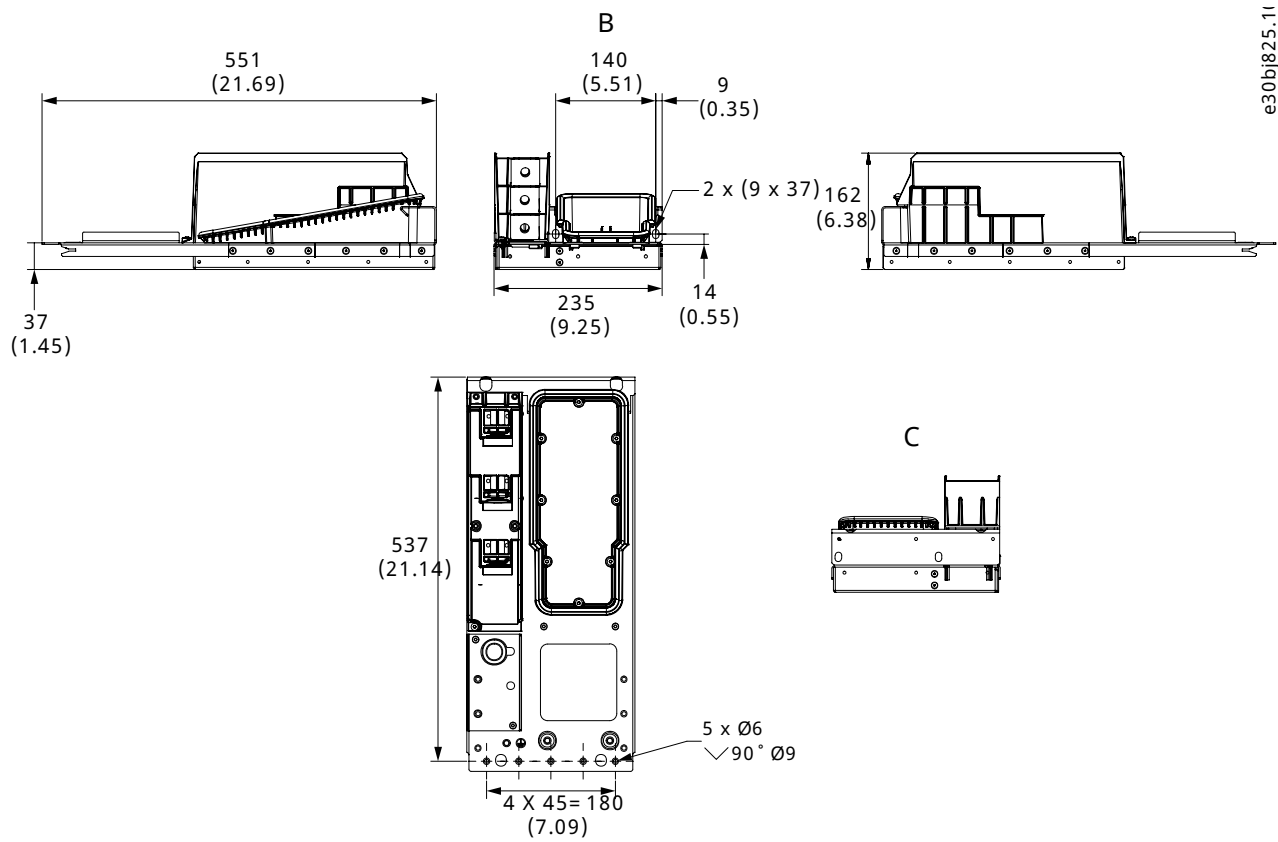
Dimensions of the Short Integration Unit for AFE Module in mm (in)
